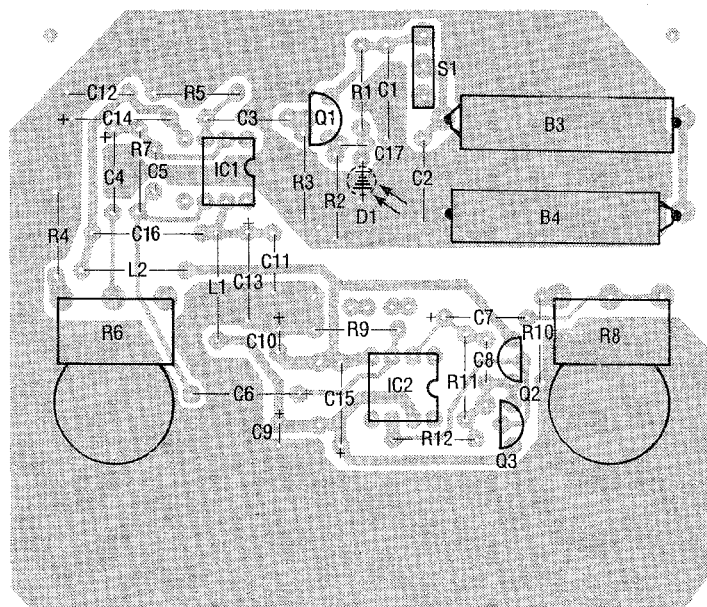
RECEIVER PARTS-PLACEMENT DIAGRAM.
